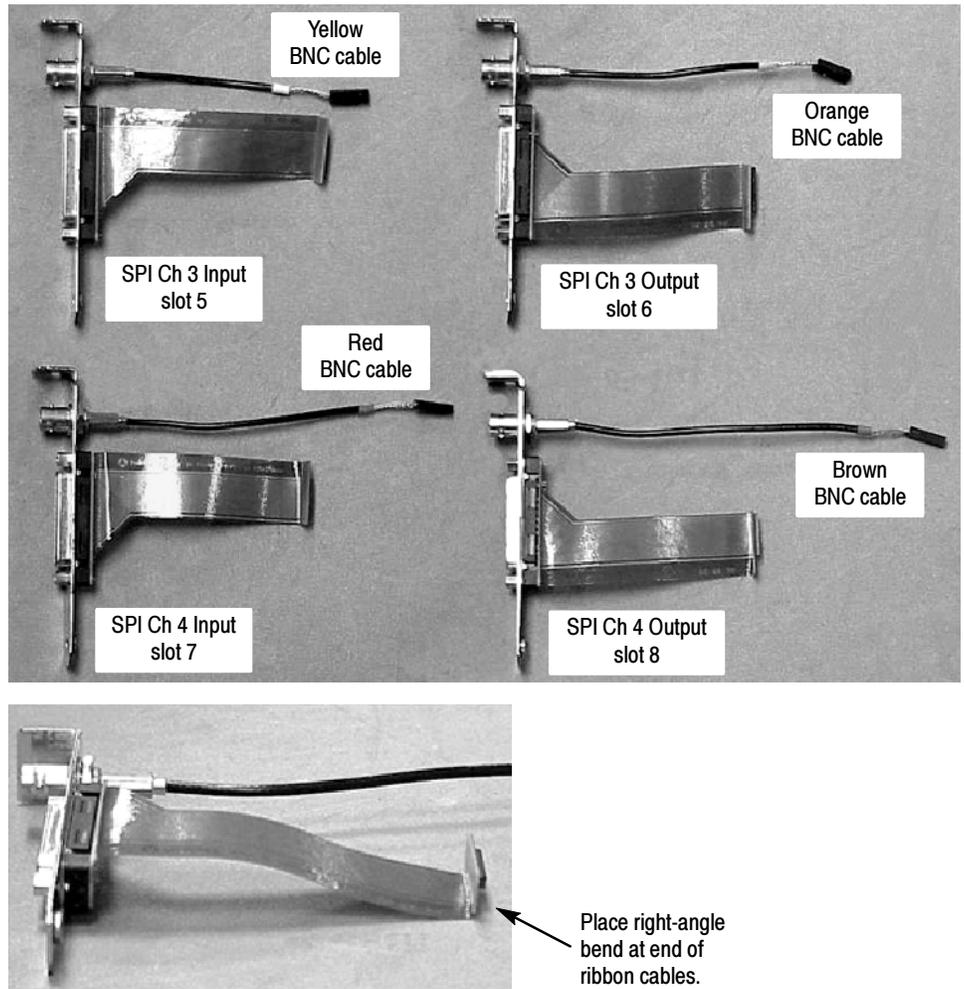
shows how to install the SPI ribbon cables onto the SPI board.
